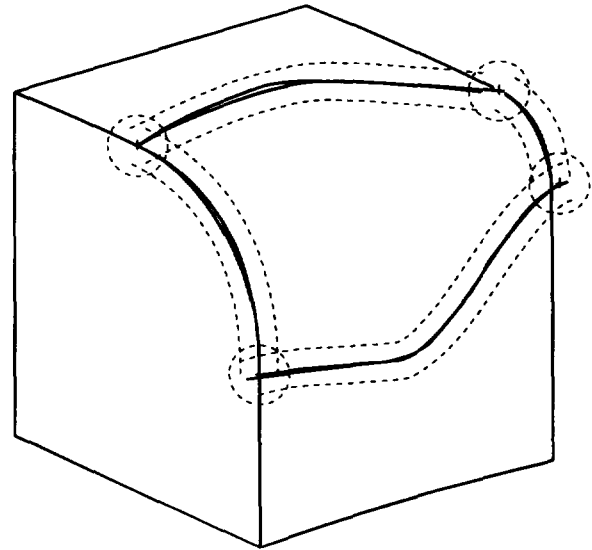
A blend showing exaggeratedly large local tolerances.
